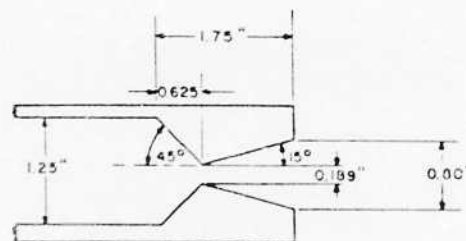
Eleven-pound-thrust rocket motor nozzle
